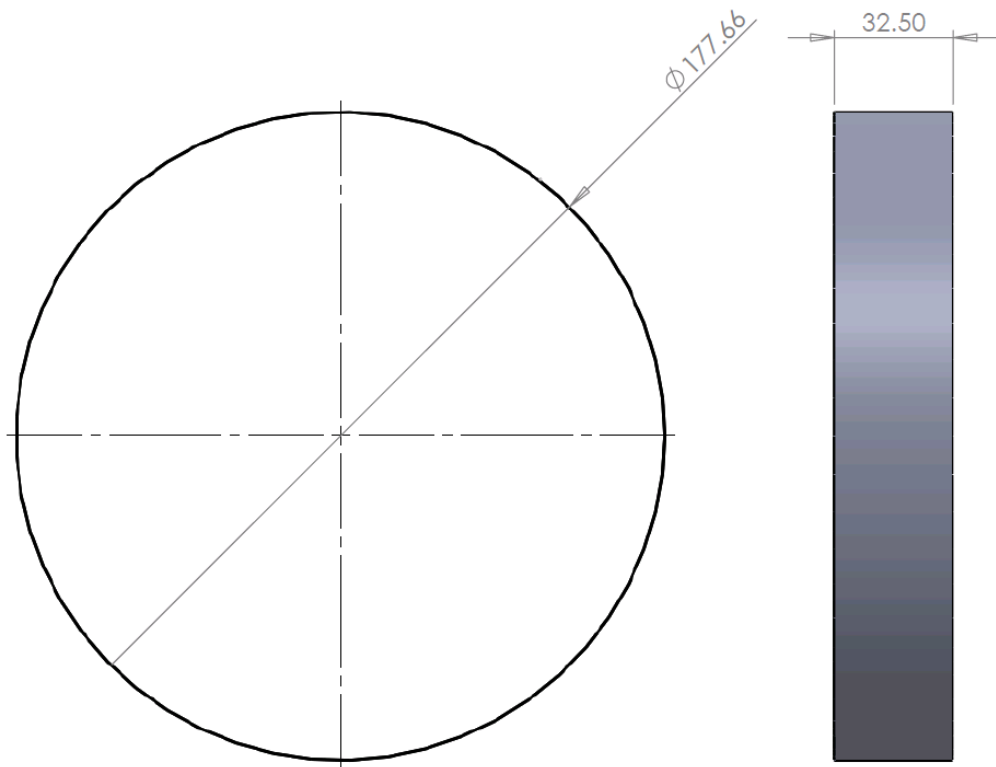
Modifying the impeller width showing (a) isometric view and (b) cross-sectional view; example dimensions are for pump B.
